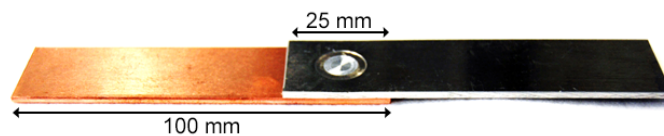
Al/Cu friction spot-welded sample for lap-shear testing.
